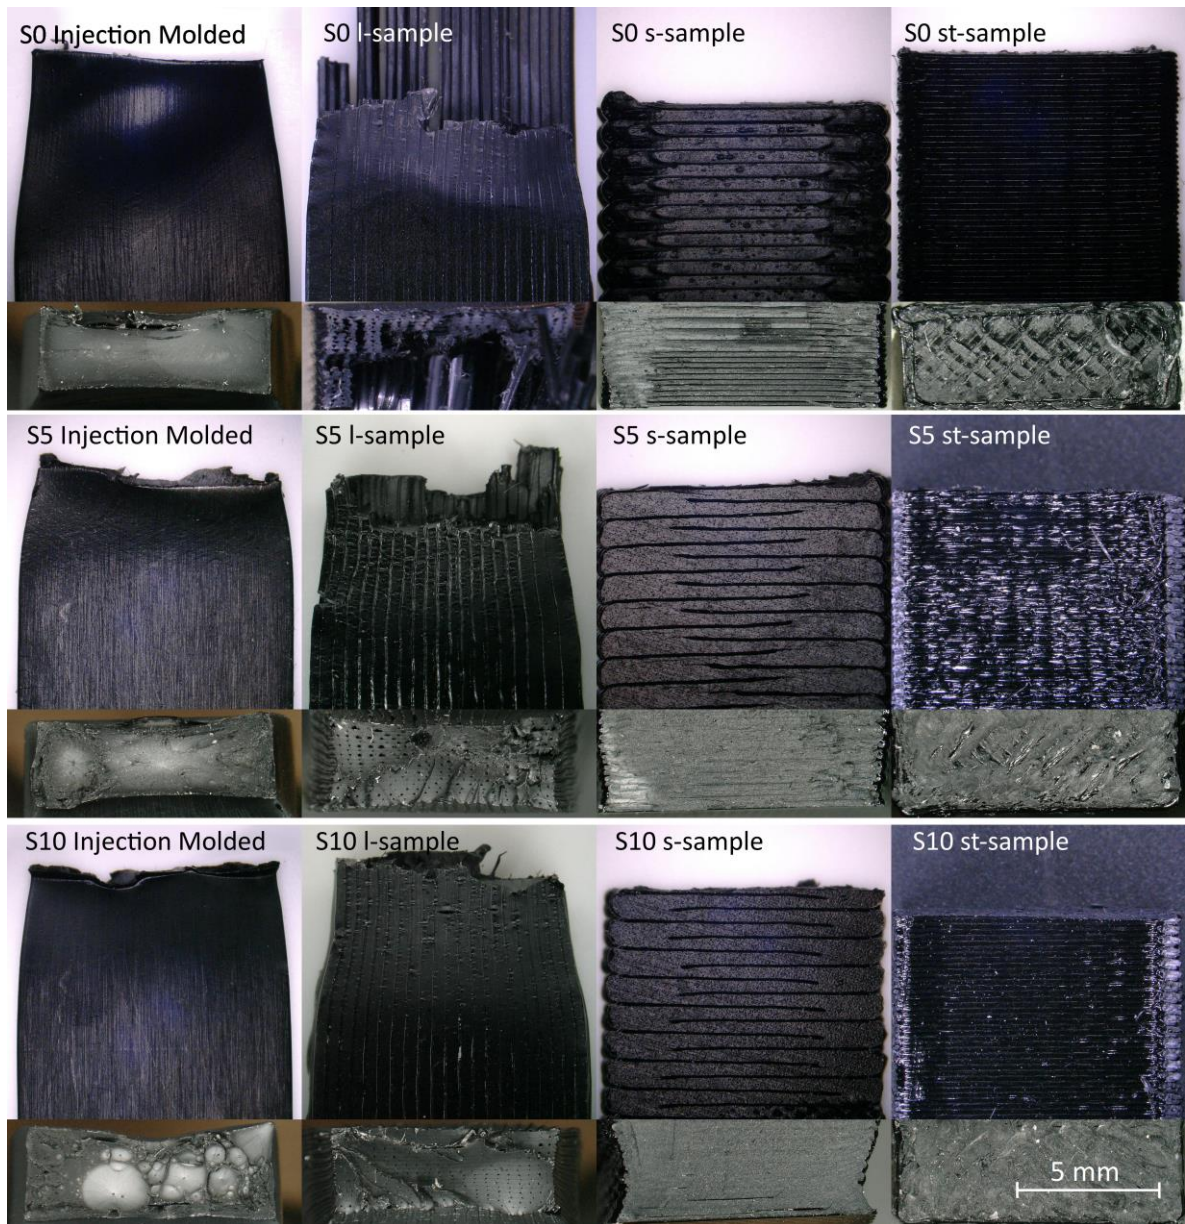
Representative optical microscopy images of tensile test specimen failure surfaces, side view (upper images) and top view (lower images)
